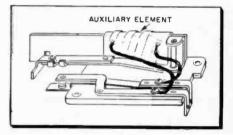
Timing mechanism of a popular toaster is shown, together with its auxiliary heater.
